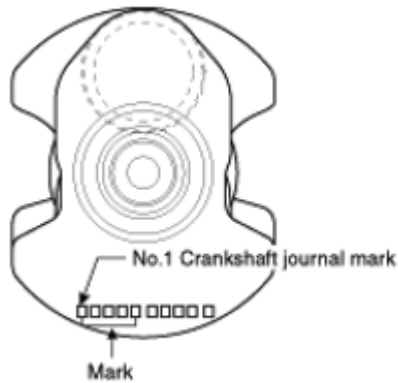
Identifying No. 1 Crankshaft Bore Mark
